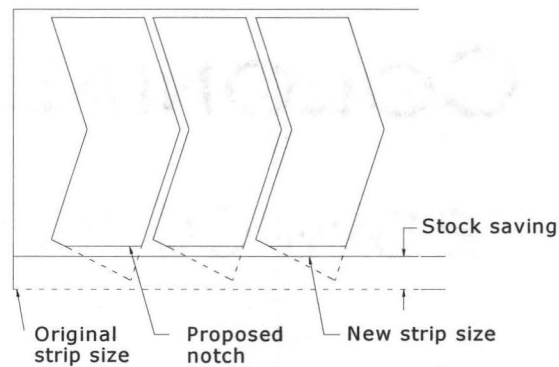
Strip layout with unnecessary corners cut off to save material (Wilson et al., 1965)
